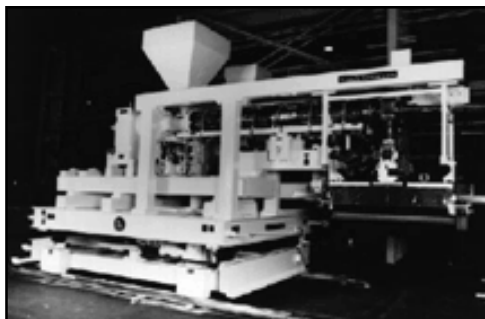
Extrusion Coating Carriage, showing extruder and die [2]
